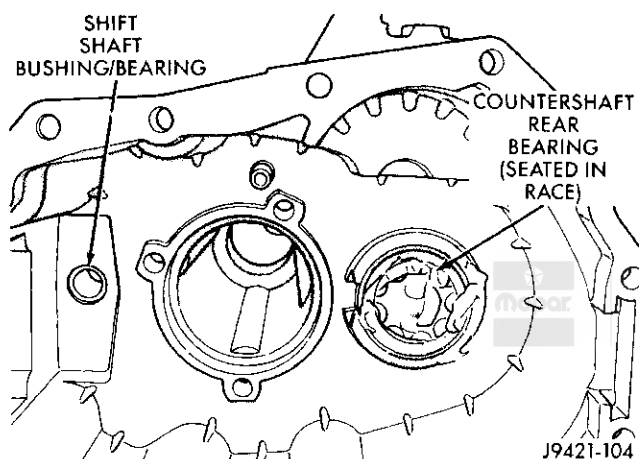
Countershaft Rear Bearing Seated In Seated in Race
